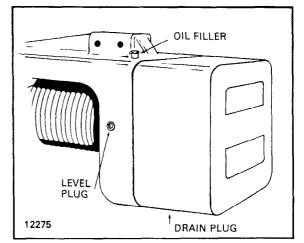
View showing location of Oil Filler Oil Level Plug and Oil Drain Plug.
